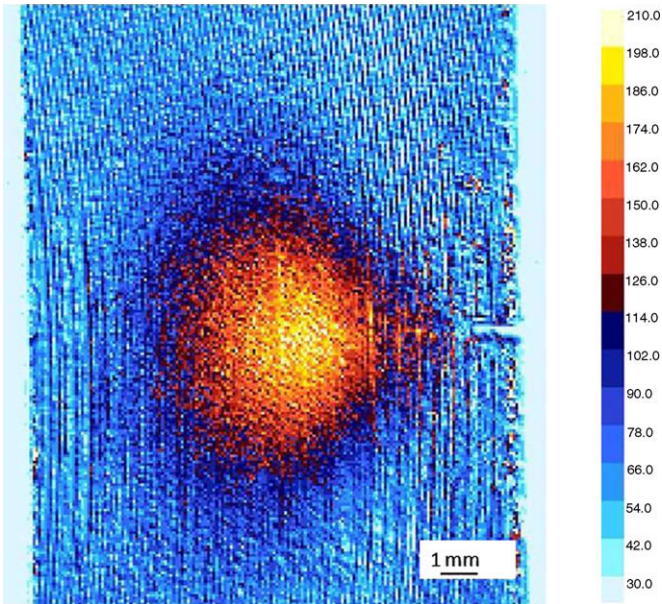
Thermoelastic image representing the stress field map for the specimen welded at 1600 RPM, 230 mm/min after 31,400 cycles.
